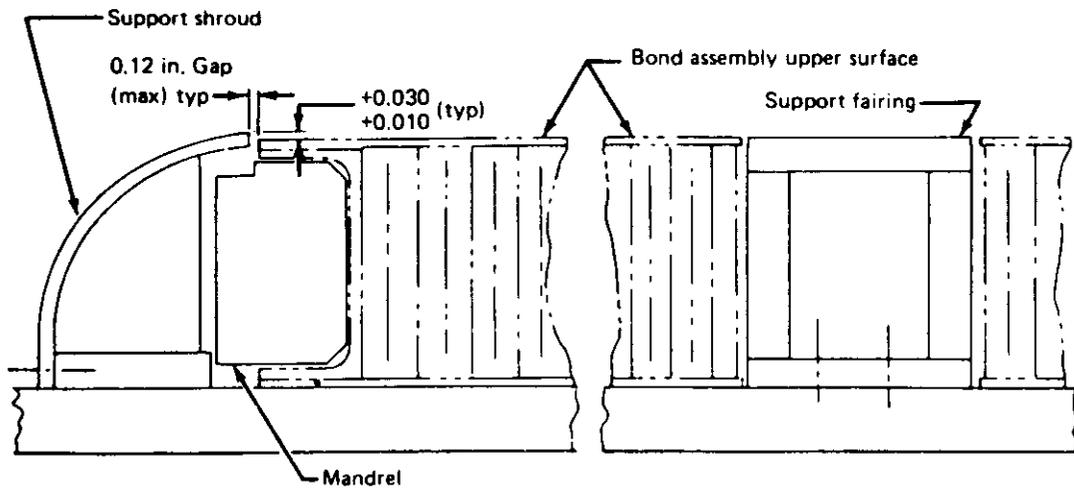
Typical vacuum blanket support details.
